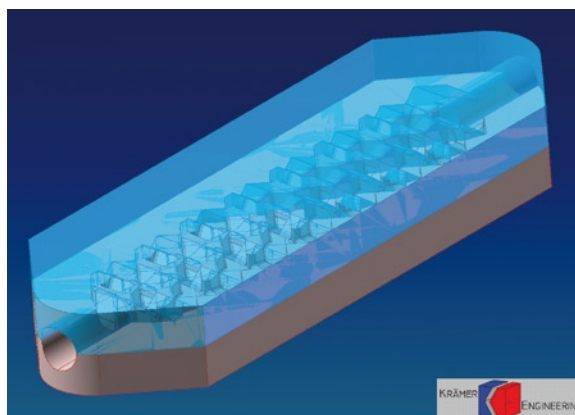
Component drawing of the mixer (split-and-recombine mixer) with a 4 mm diameter inlet and outlet runner.
